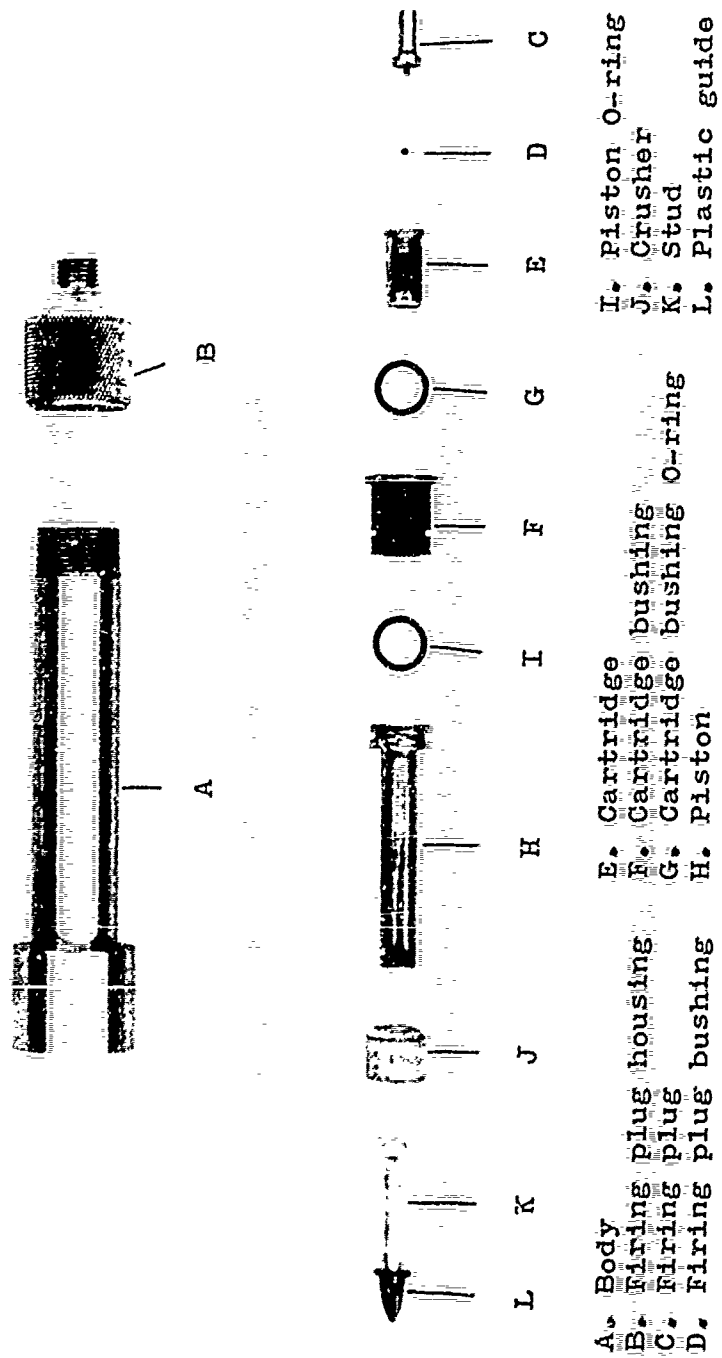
Stud Driving Test Device Using Prototype Components (Exploded and Sectioned Assembly Views)
